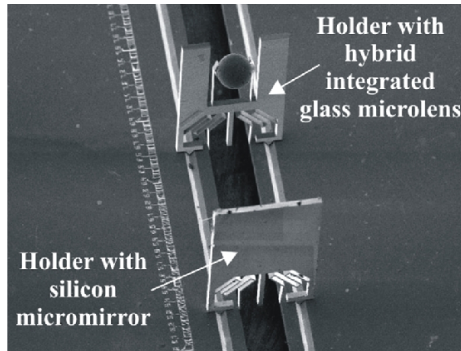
Example of the assembly of flexible optical components to realize hybrid MOEMS.
